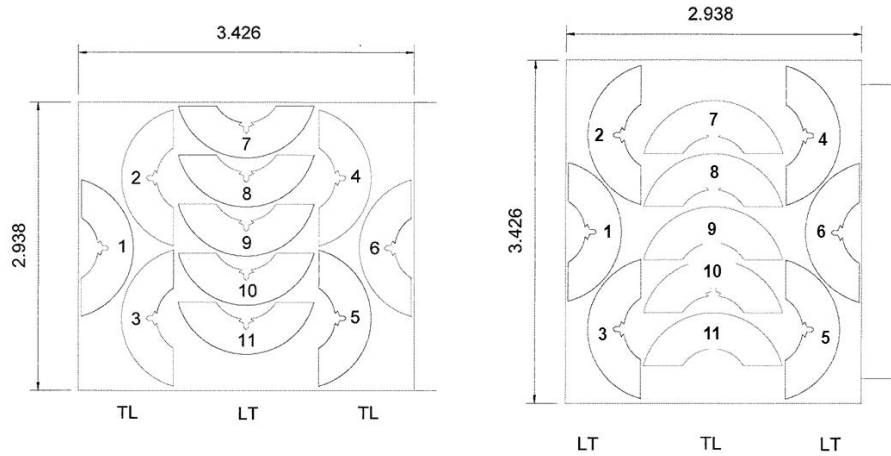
LANL Type 21-6-9 Brick Forging 7K0004. Dimensions are in Inches.
